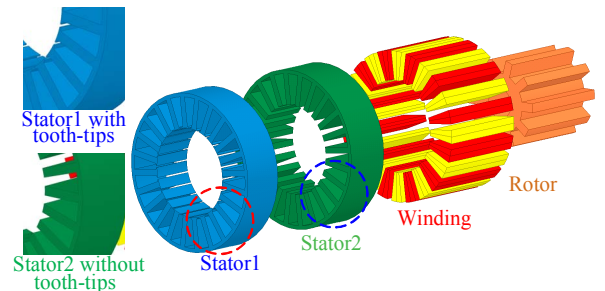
12-slot/10-pole WFSF machine with axial pairing of stator tooth-tips.
